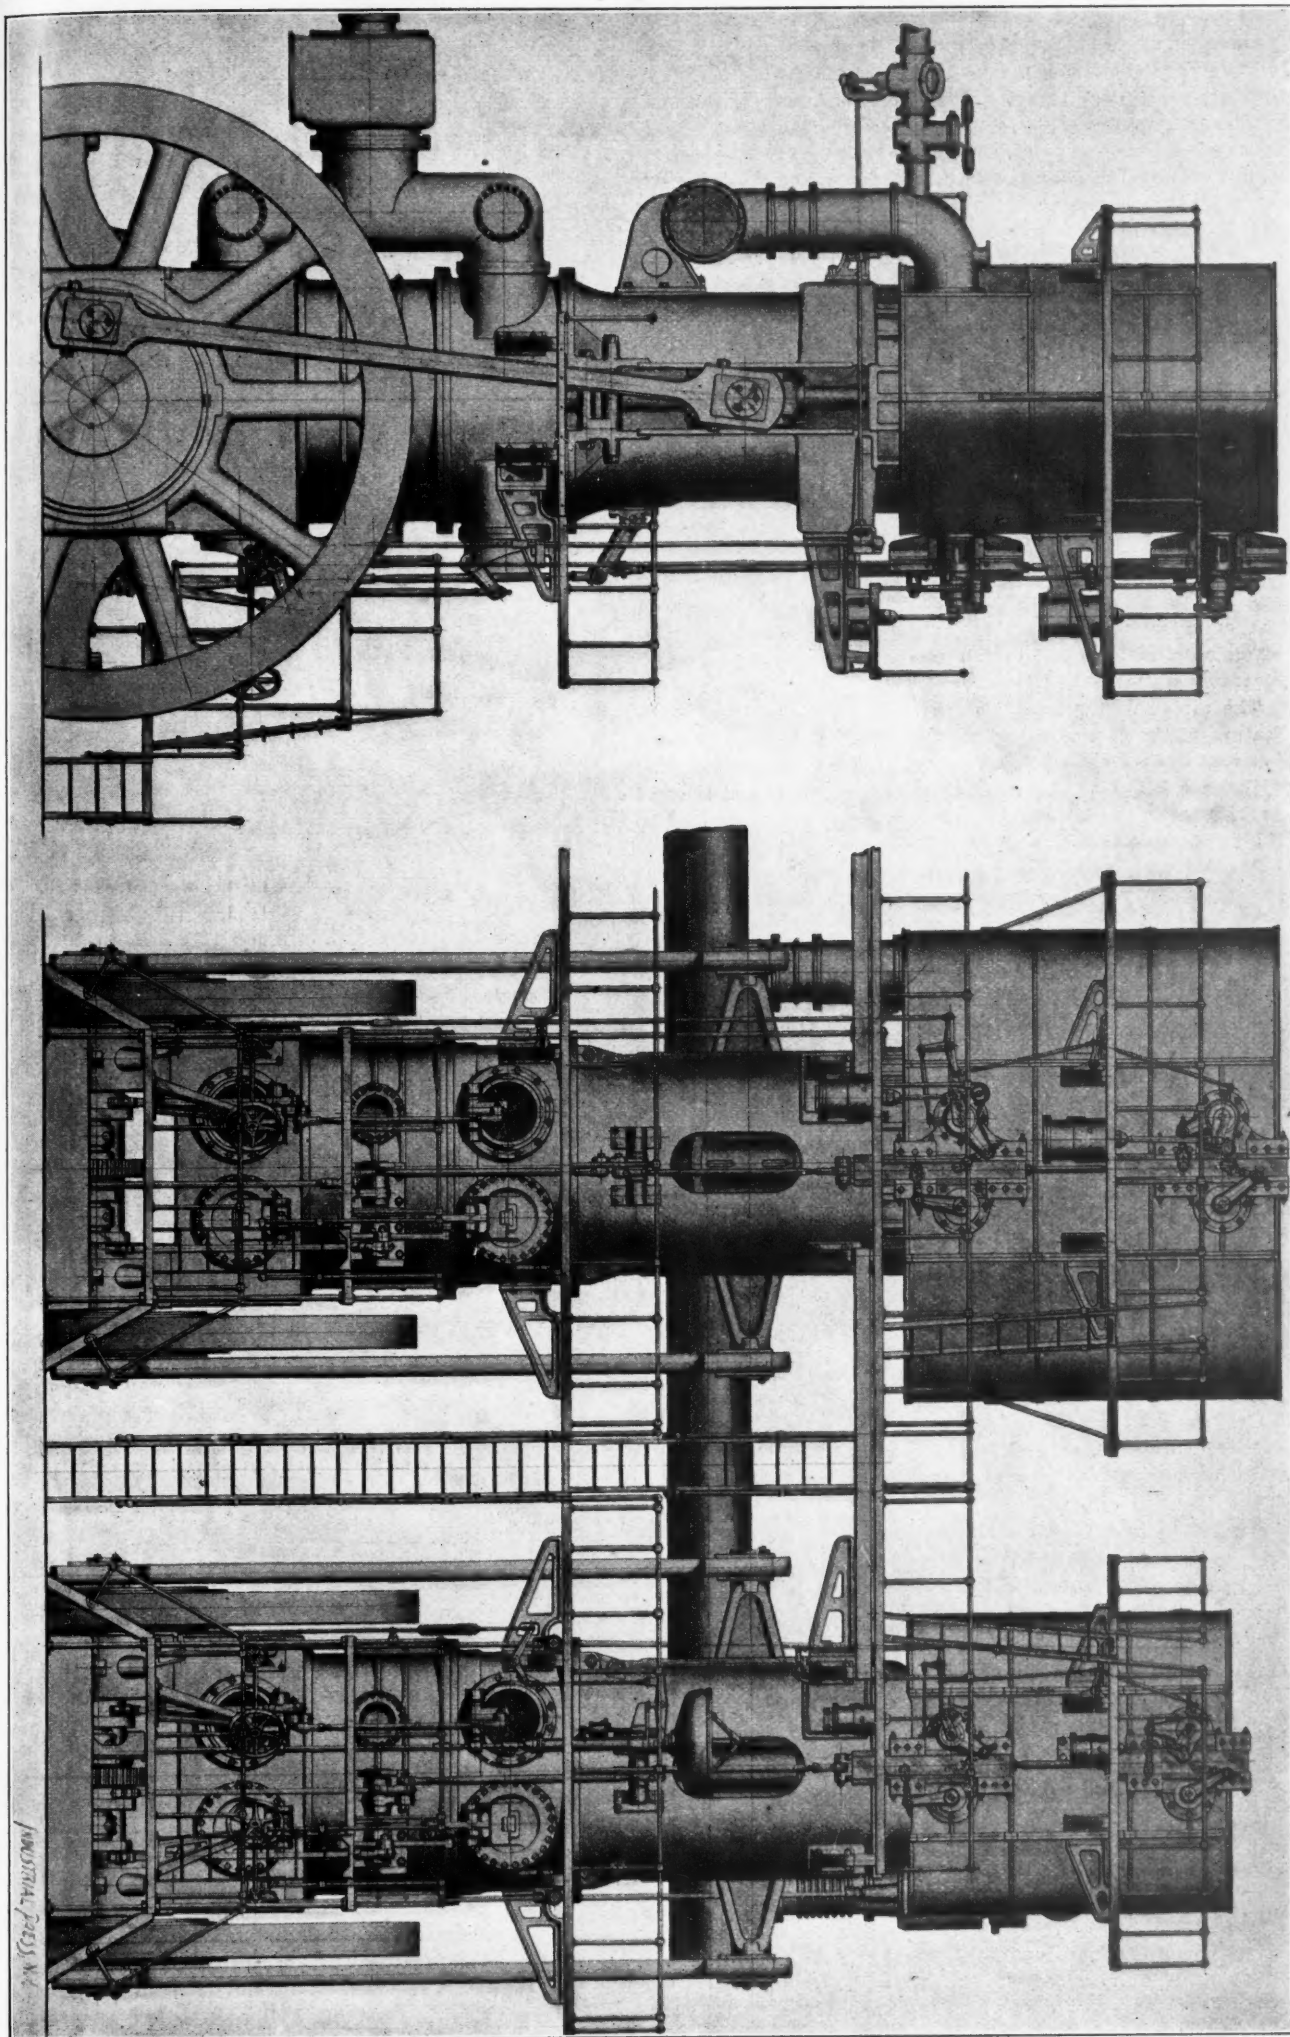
2000 H. P. Compound Blowing Engine. Steam Cylinders 60 and 66 inches in Diameter by 66 inches Stroke; Air Cylinders, 66 inches Diameter.
